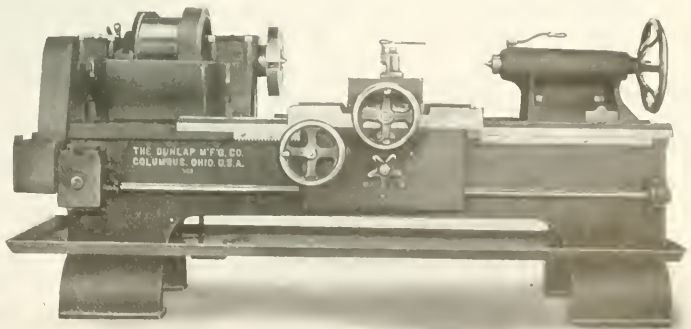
Dunlap 21-inch Shell Turning and Boring Lathe
